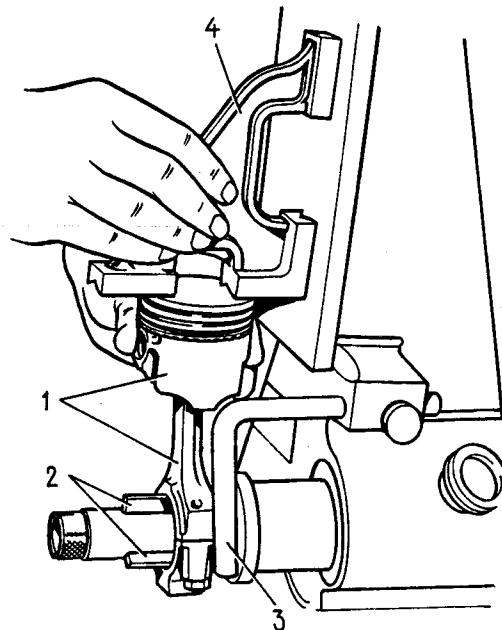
Checking Axes of Piston Pin and Connecting Rod Big End for Parallelism:
